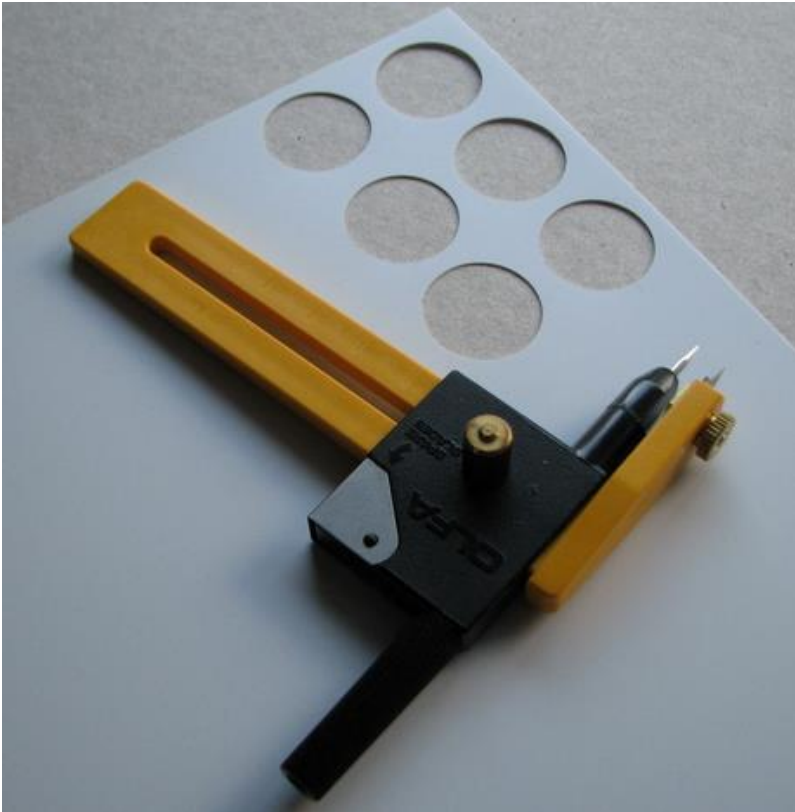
(above) and 35 (below) demonstrate the process of cutting out balance weights for the driving wheels from 10 thou plasticard using an Olfa compass cutter.
